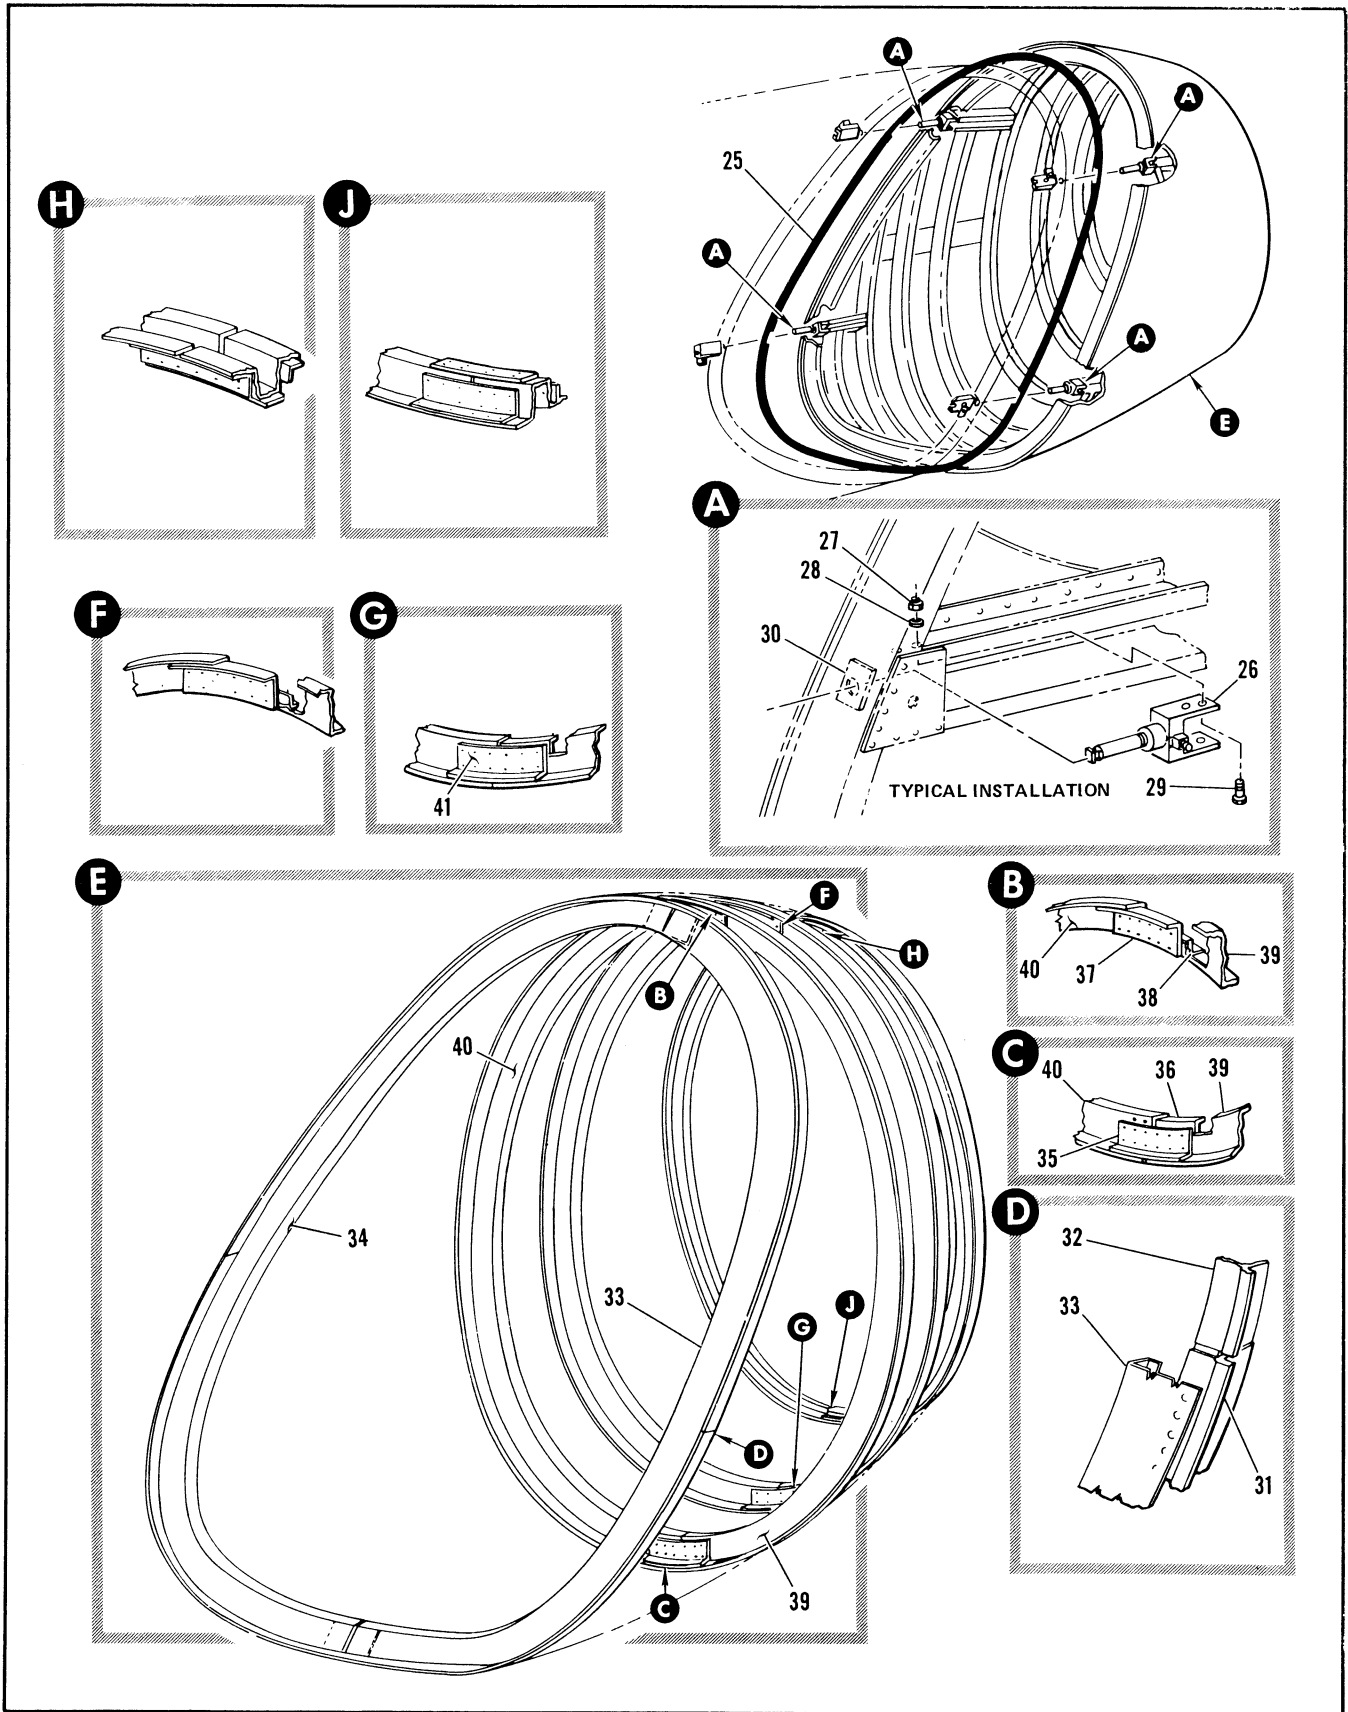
Tail Cone Assembly (Sheet 3 of 6)
